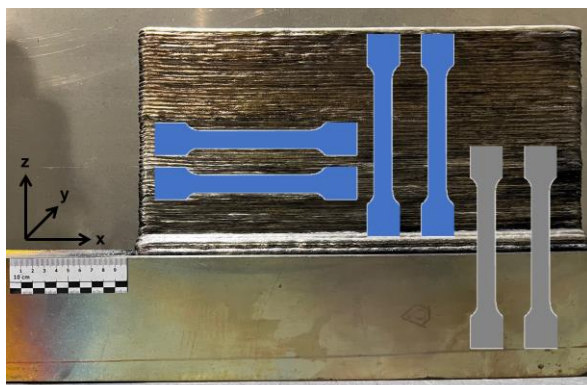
Sampling plan for tensile test specimens from wall structure; blue = additively manufactured area, grey = transition between casted material and additively manufactured structure
